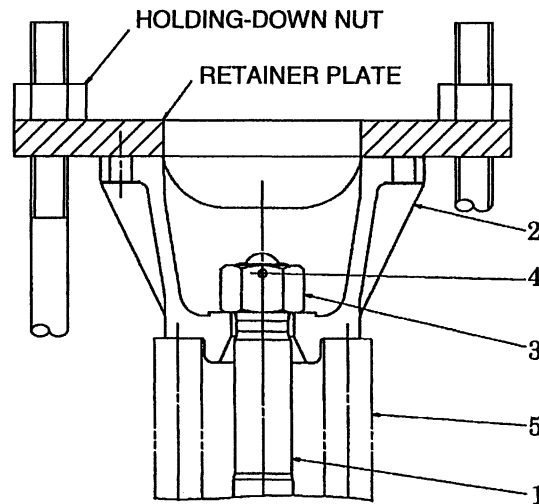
Compression of spring (5), and attaching nut (3) and spring pin (4)
